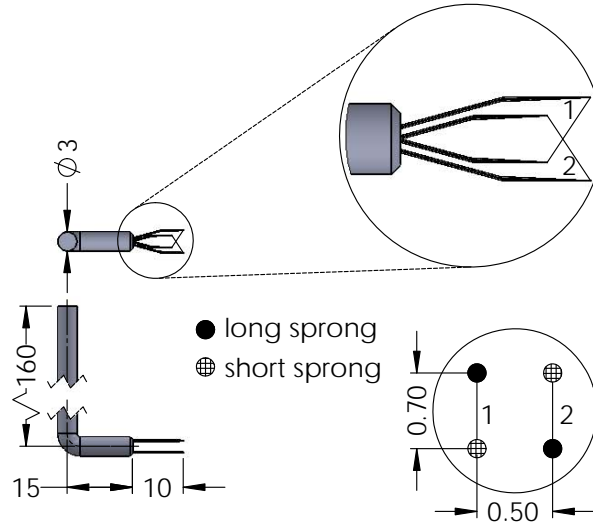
Sketch of the right-angle cross-wire probe (Don, 2016). Dimensions are in mm.
